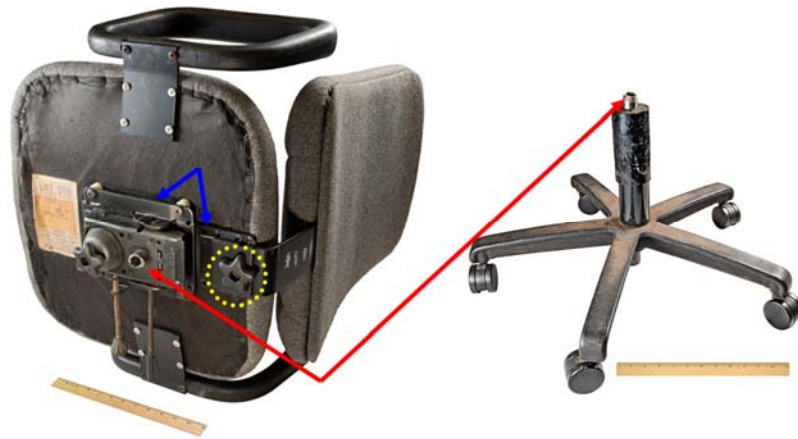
EckAdams office chair, as received. The red arrows indicate the location of the cylinder failure, the yellow circle indicates the location of the chair back adjustment knob, and the blue arrows indicate the locations of the chair back mounting plate and the base plate. Scale is 1 foot.
